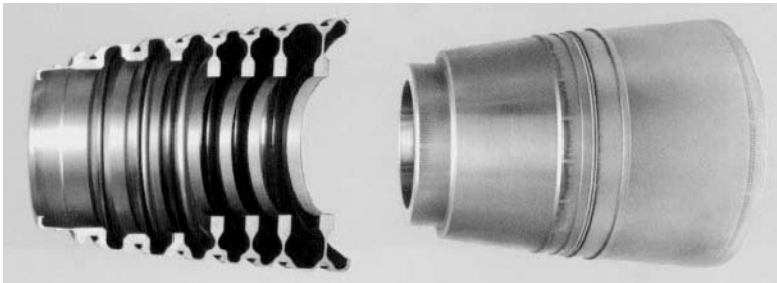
Photo of inertia welded part (at right) made from the two pieces shown in Fig. 3.57, cross section of part (at left) showing the seven disk stages (courtesy MTU)
